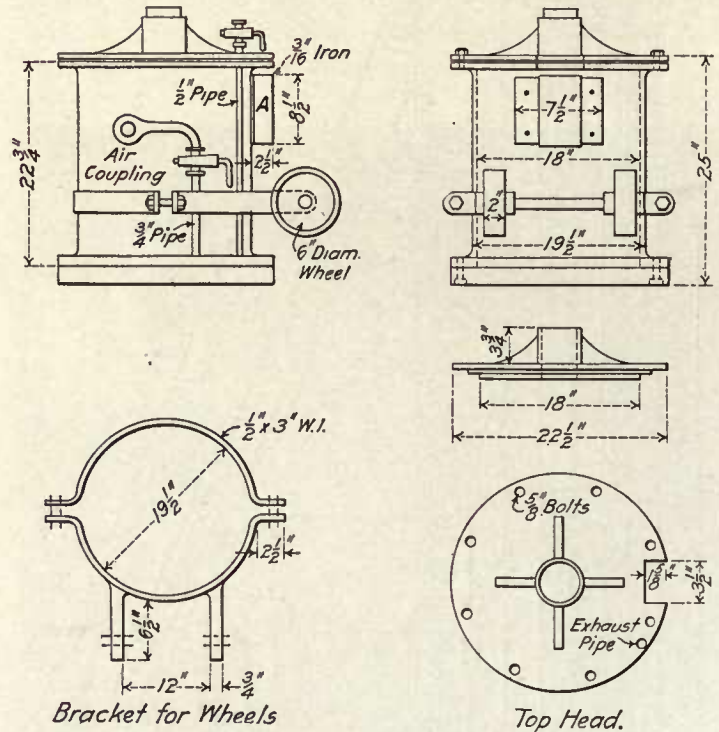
Twelve-Ton Portable Pneumatic Jack.
